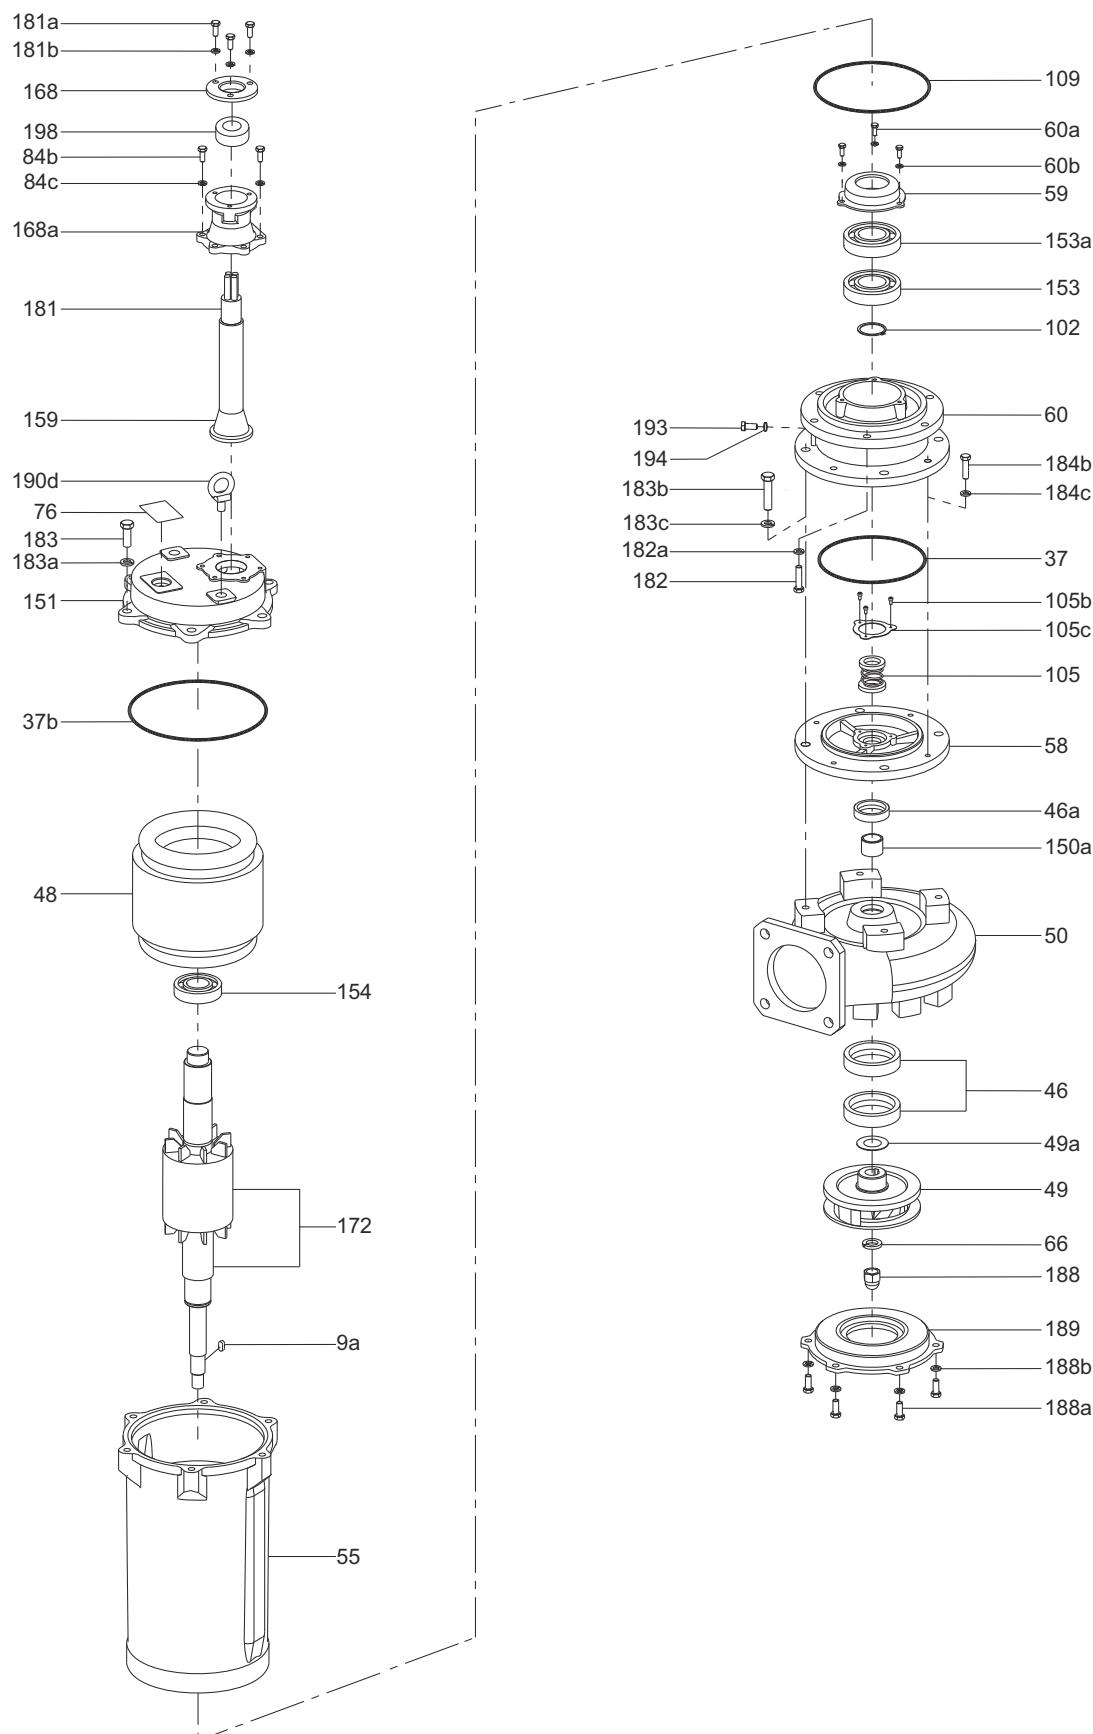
Exploded view DPK.20.150.190 and DPK.20.150.220
